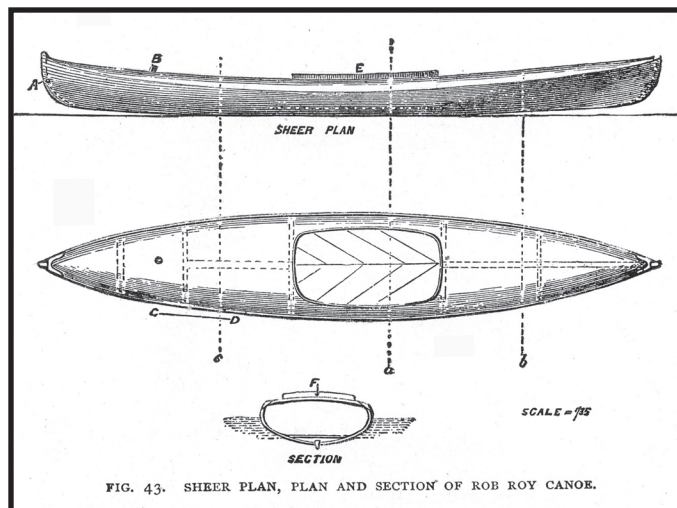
SHEER PLAN, PLAN AND SECTION OF ROB ROY CANOE.
